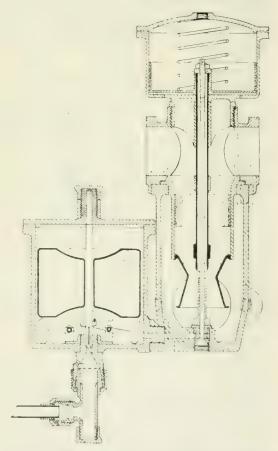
SECTIONAL ELEVATION OF CARBURETTER. BROTHERHOOD-CROCKER MOTORS, LTD.
